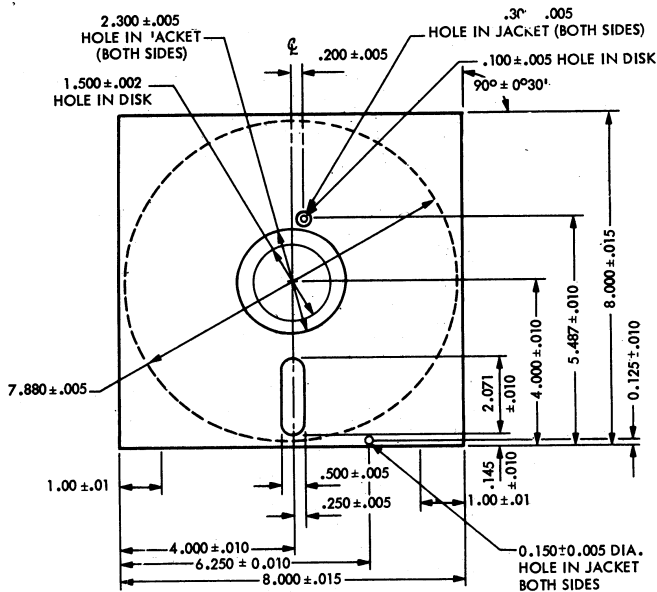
DISKETTE PHYSICAL DIMENSIONS
